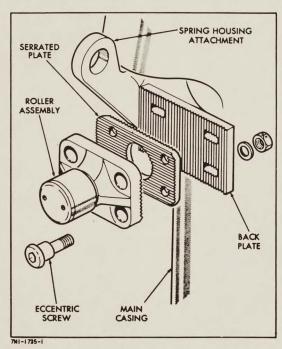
LEG UP-LOCK ROLLER ASSEMBLY
